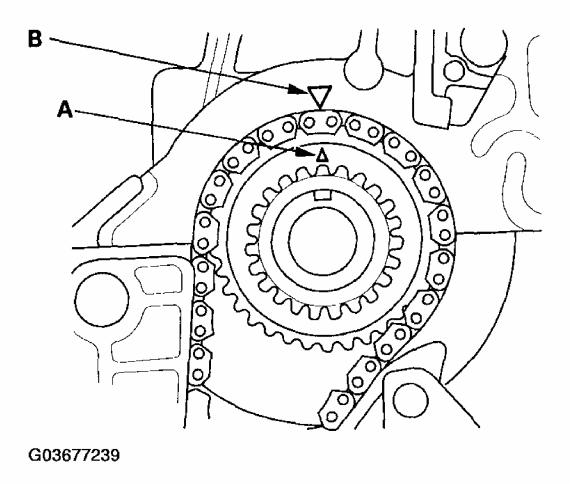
Aligning TDC Mark On Crankshaft Sprocket With Pointer On Engine Block
